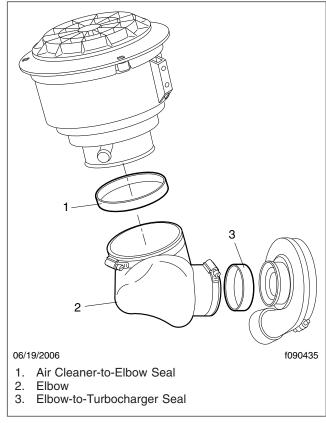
, Typical Elbow-to-Turbocharger Configuration (CAT C7 engine shown)
